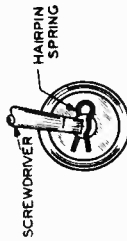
Putting a Hair Spring on a Push Button Shaft
